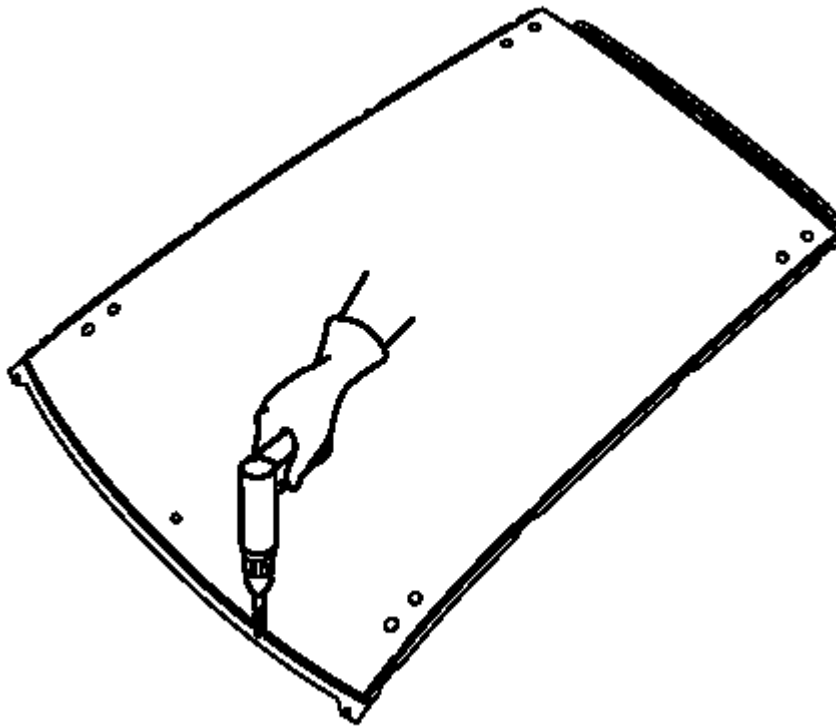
Drilling 8 mm (5/16 In) For Plug Welding Along Edges Of Service Panel
